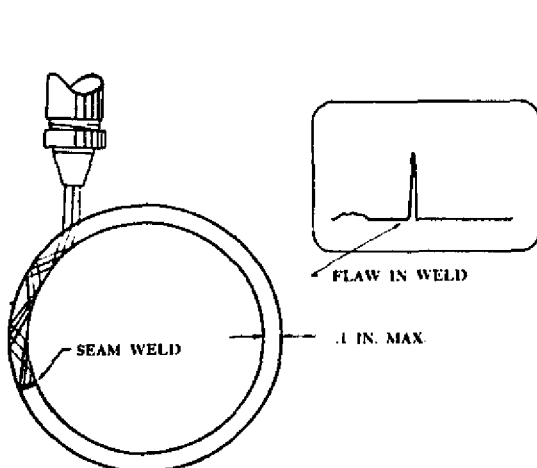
Angle beam penetrating a weld bead.
